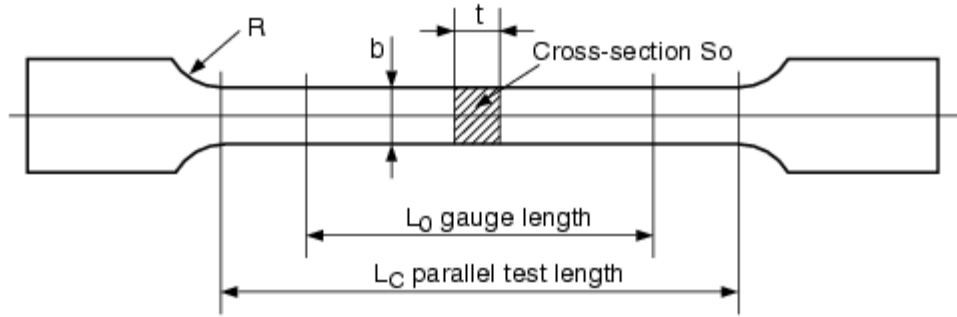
Dimensions of Flat Tensile Test Specimen
